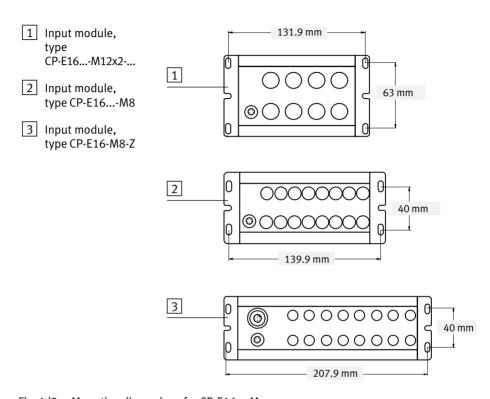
/3: Mounting dimensions for CP-E16...-M...-...
